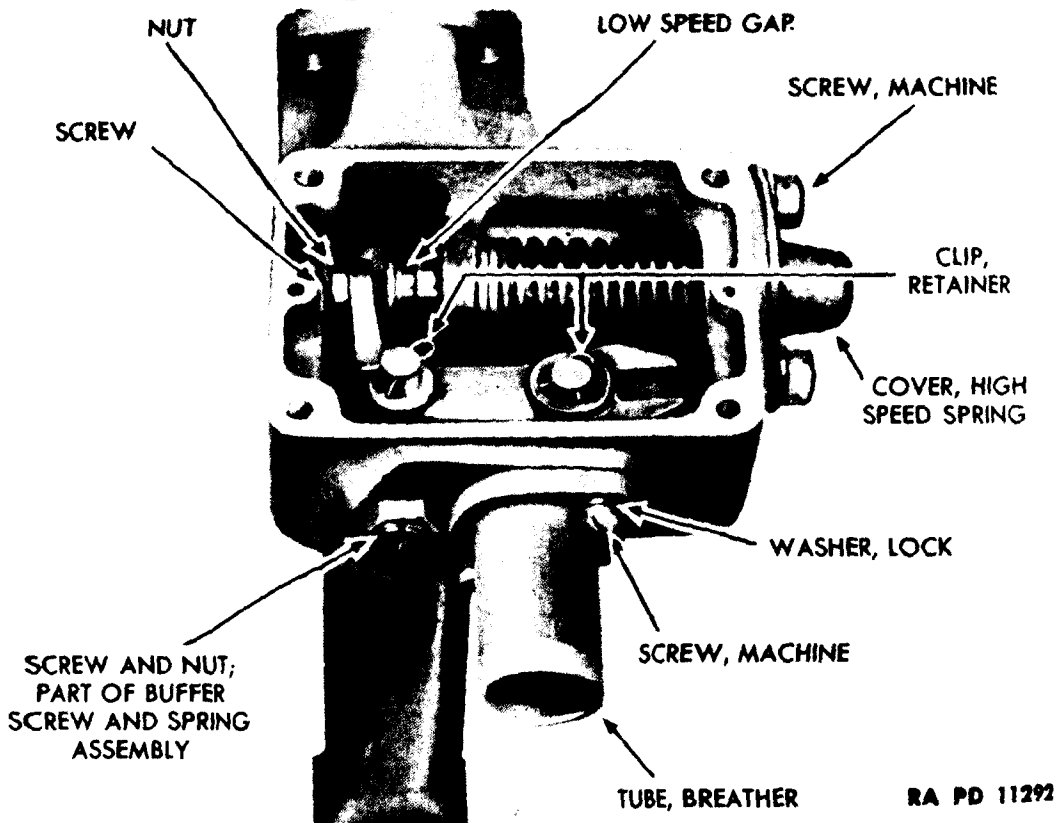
Governor Control Housing with Cover and Lever Assembly Removed
